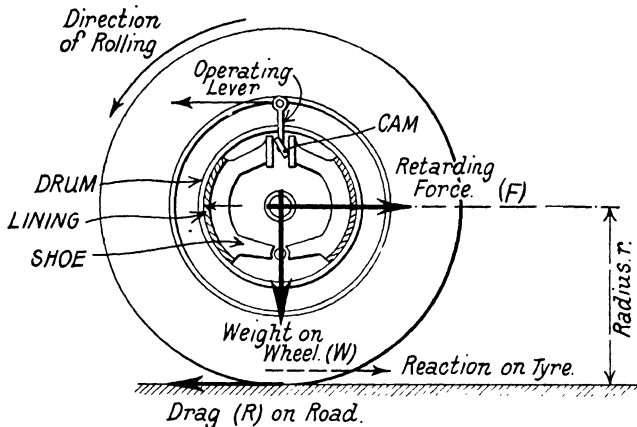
DIAGRAMMATIC VIEW OF A BRAKED WHEEL, SHOWING THE PRINCIPAL FORCES ACTING ON THE WHEEL, AXLE AND ROAD
